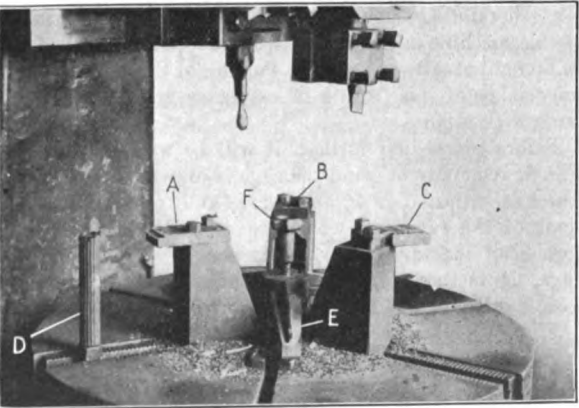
DETAILS OF THE HOLDING FIXTURE FOR THE VERTICAL TURRET LATHE
